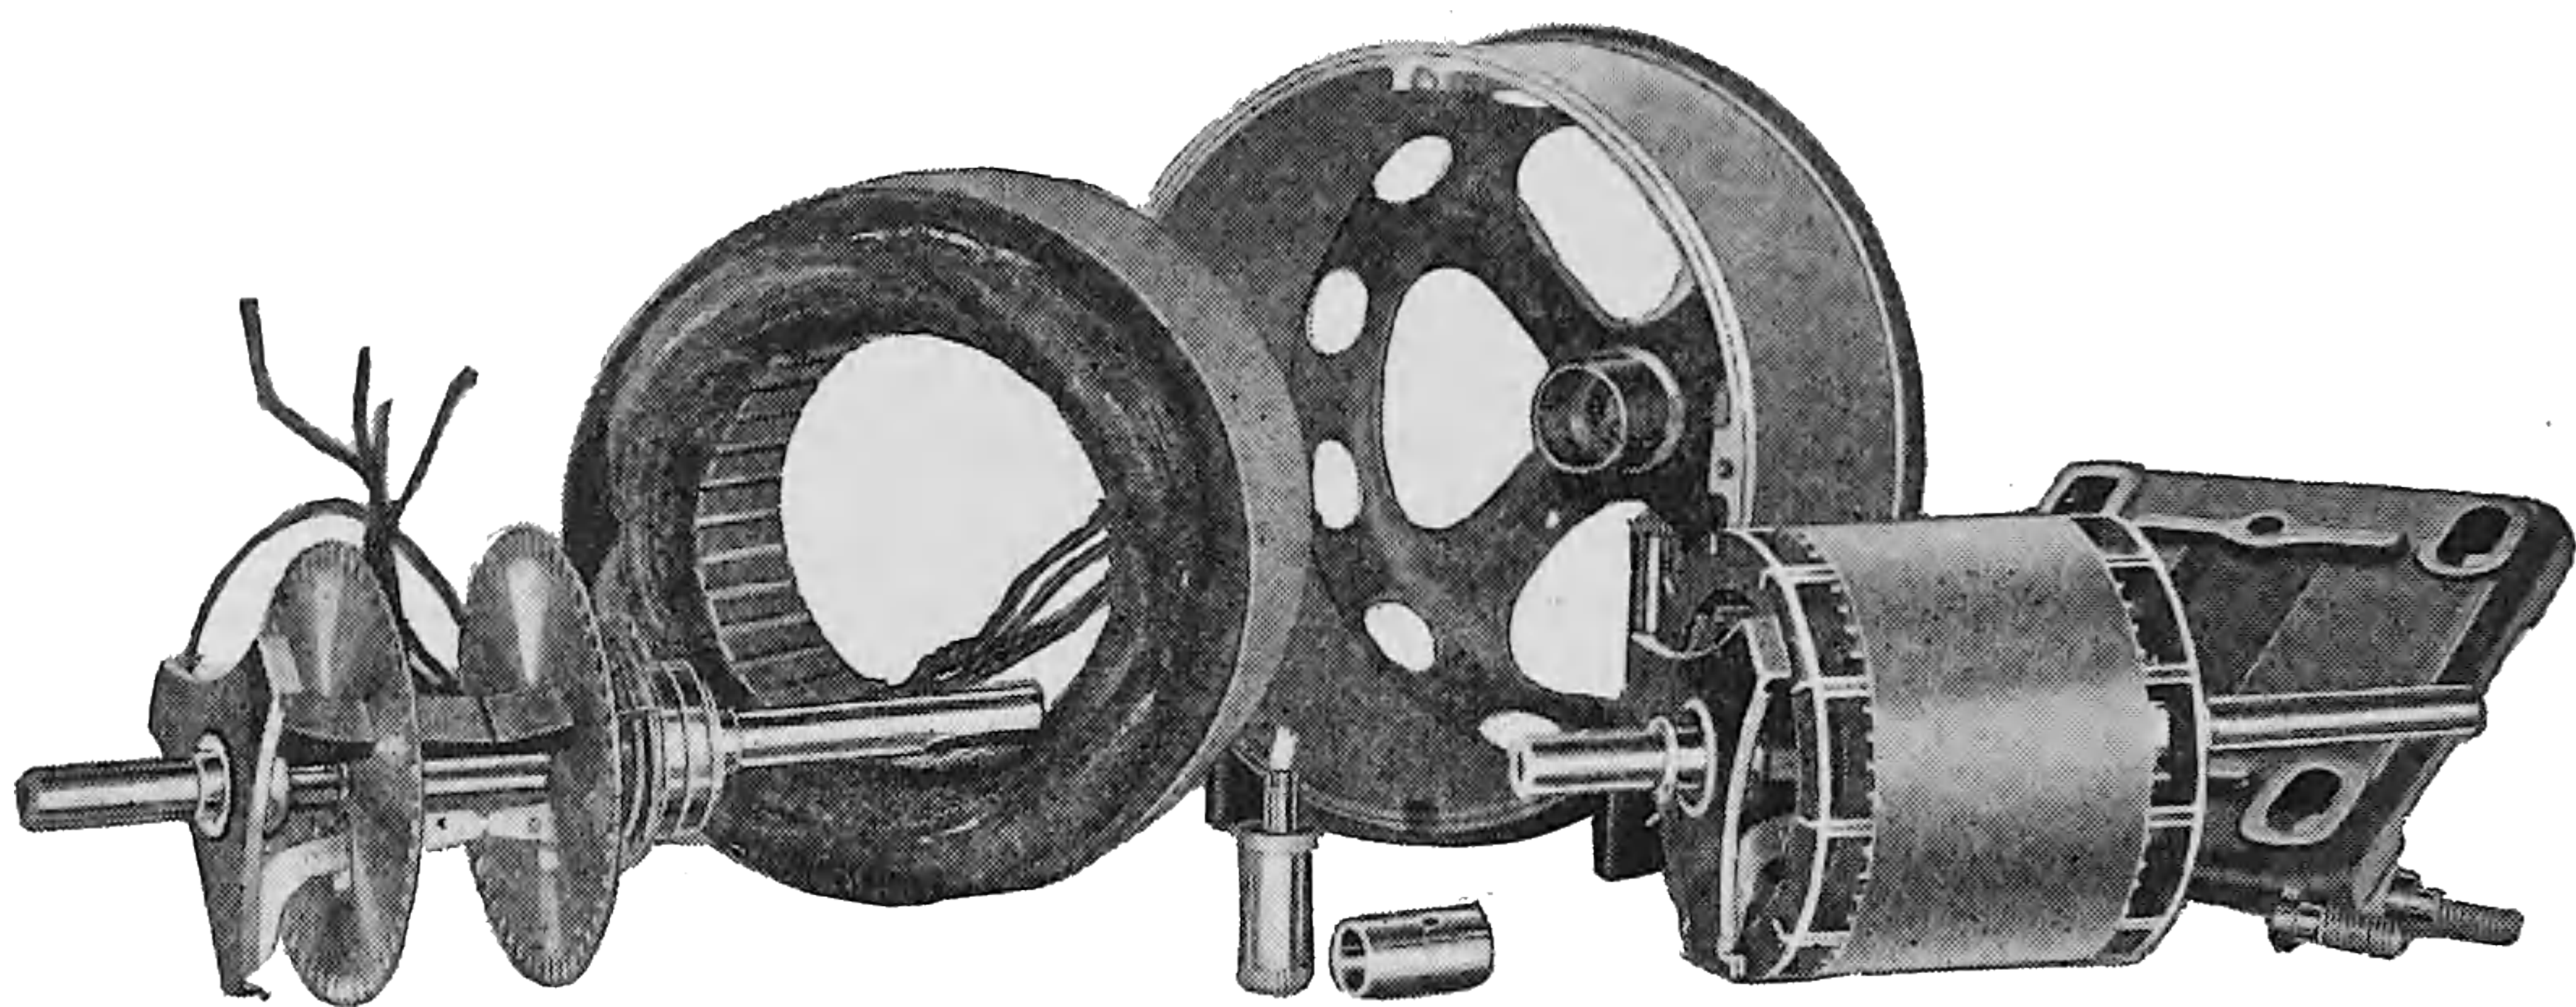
Exploded View of Century Split-Phase Induction Motor
